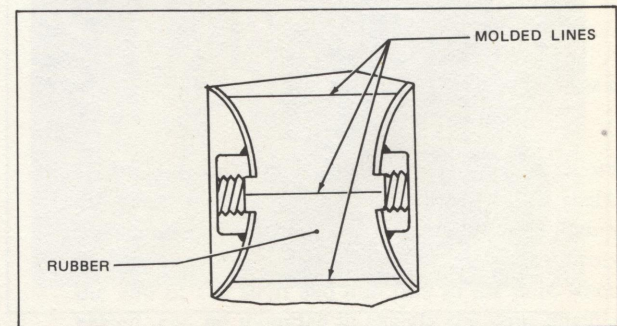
CROSS-SECTION OF RUBBER MOUNT (MOUNTING SANDWICH).
